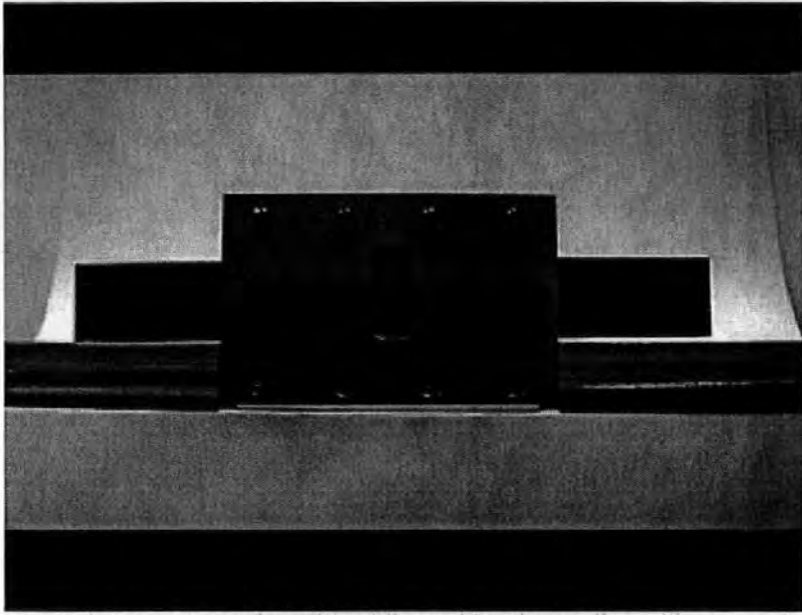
Compression test coupon in anti-buckling guide prior to align with spacers (front face shown)
